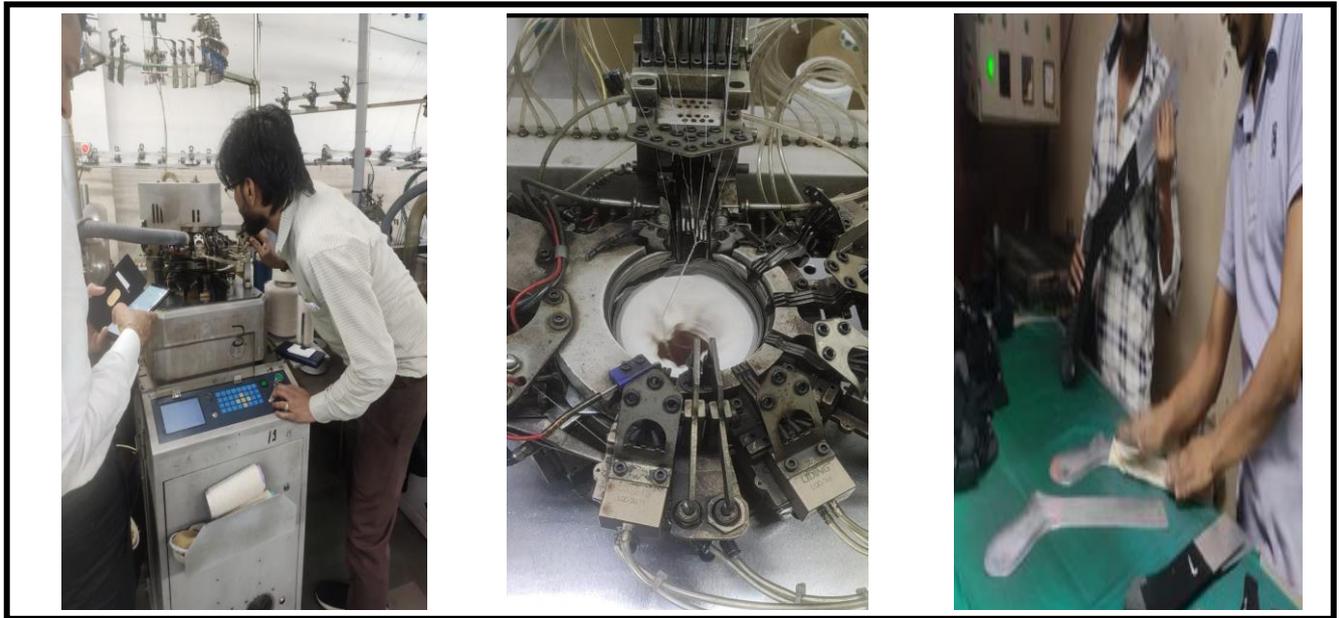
Machine setting for developing 100 % Lotus knit structure on industrial circular knitting machine
